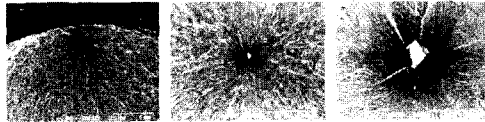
SEM photographs of fracture surface around crack initiation point for specimen SUP 7 under 2 stage shot-peened
